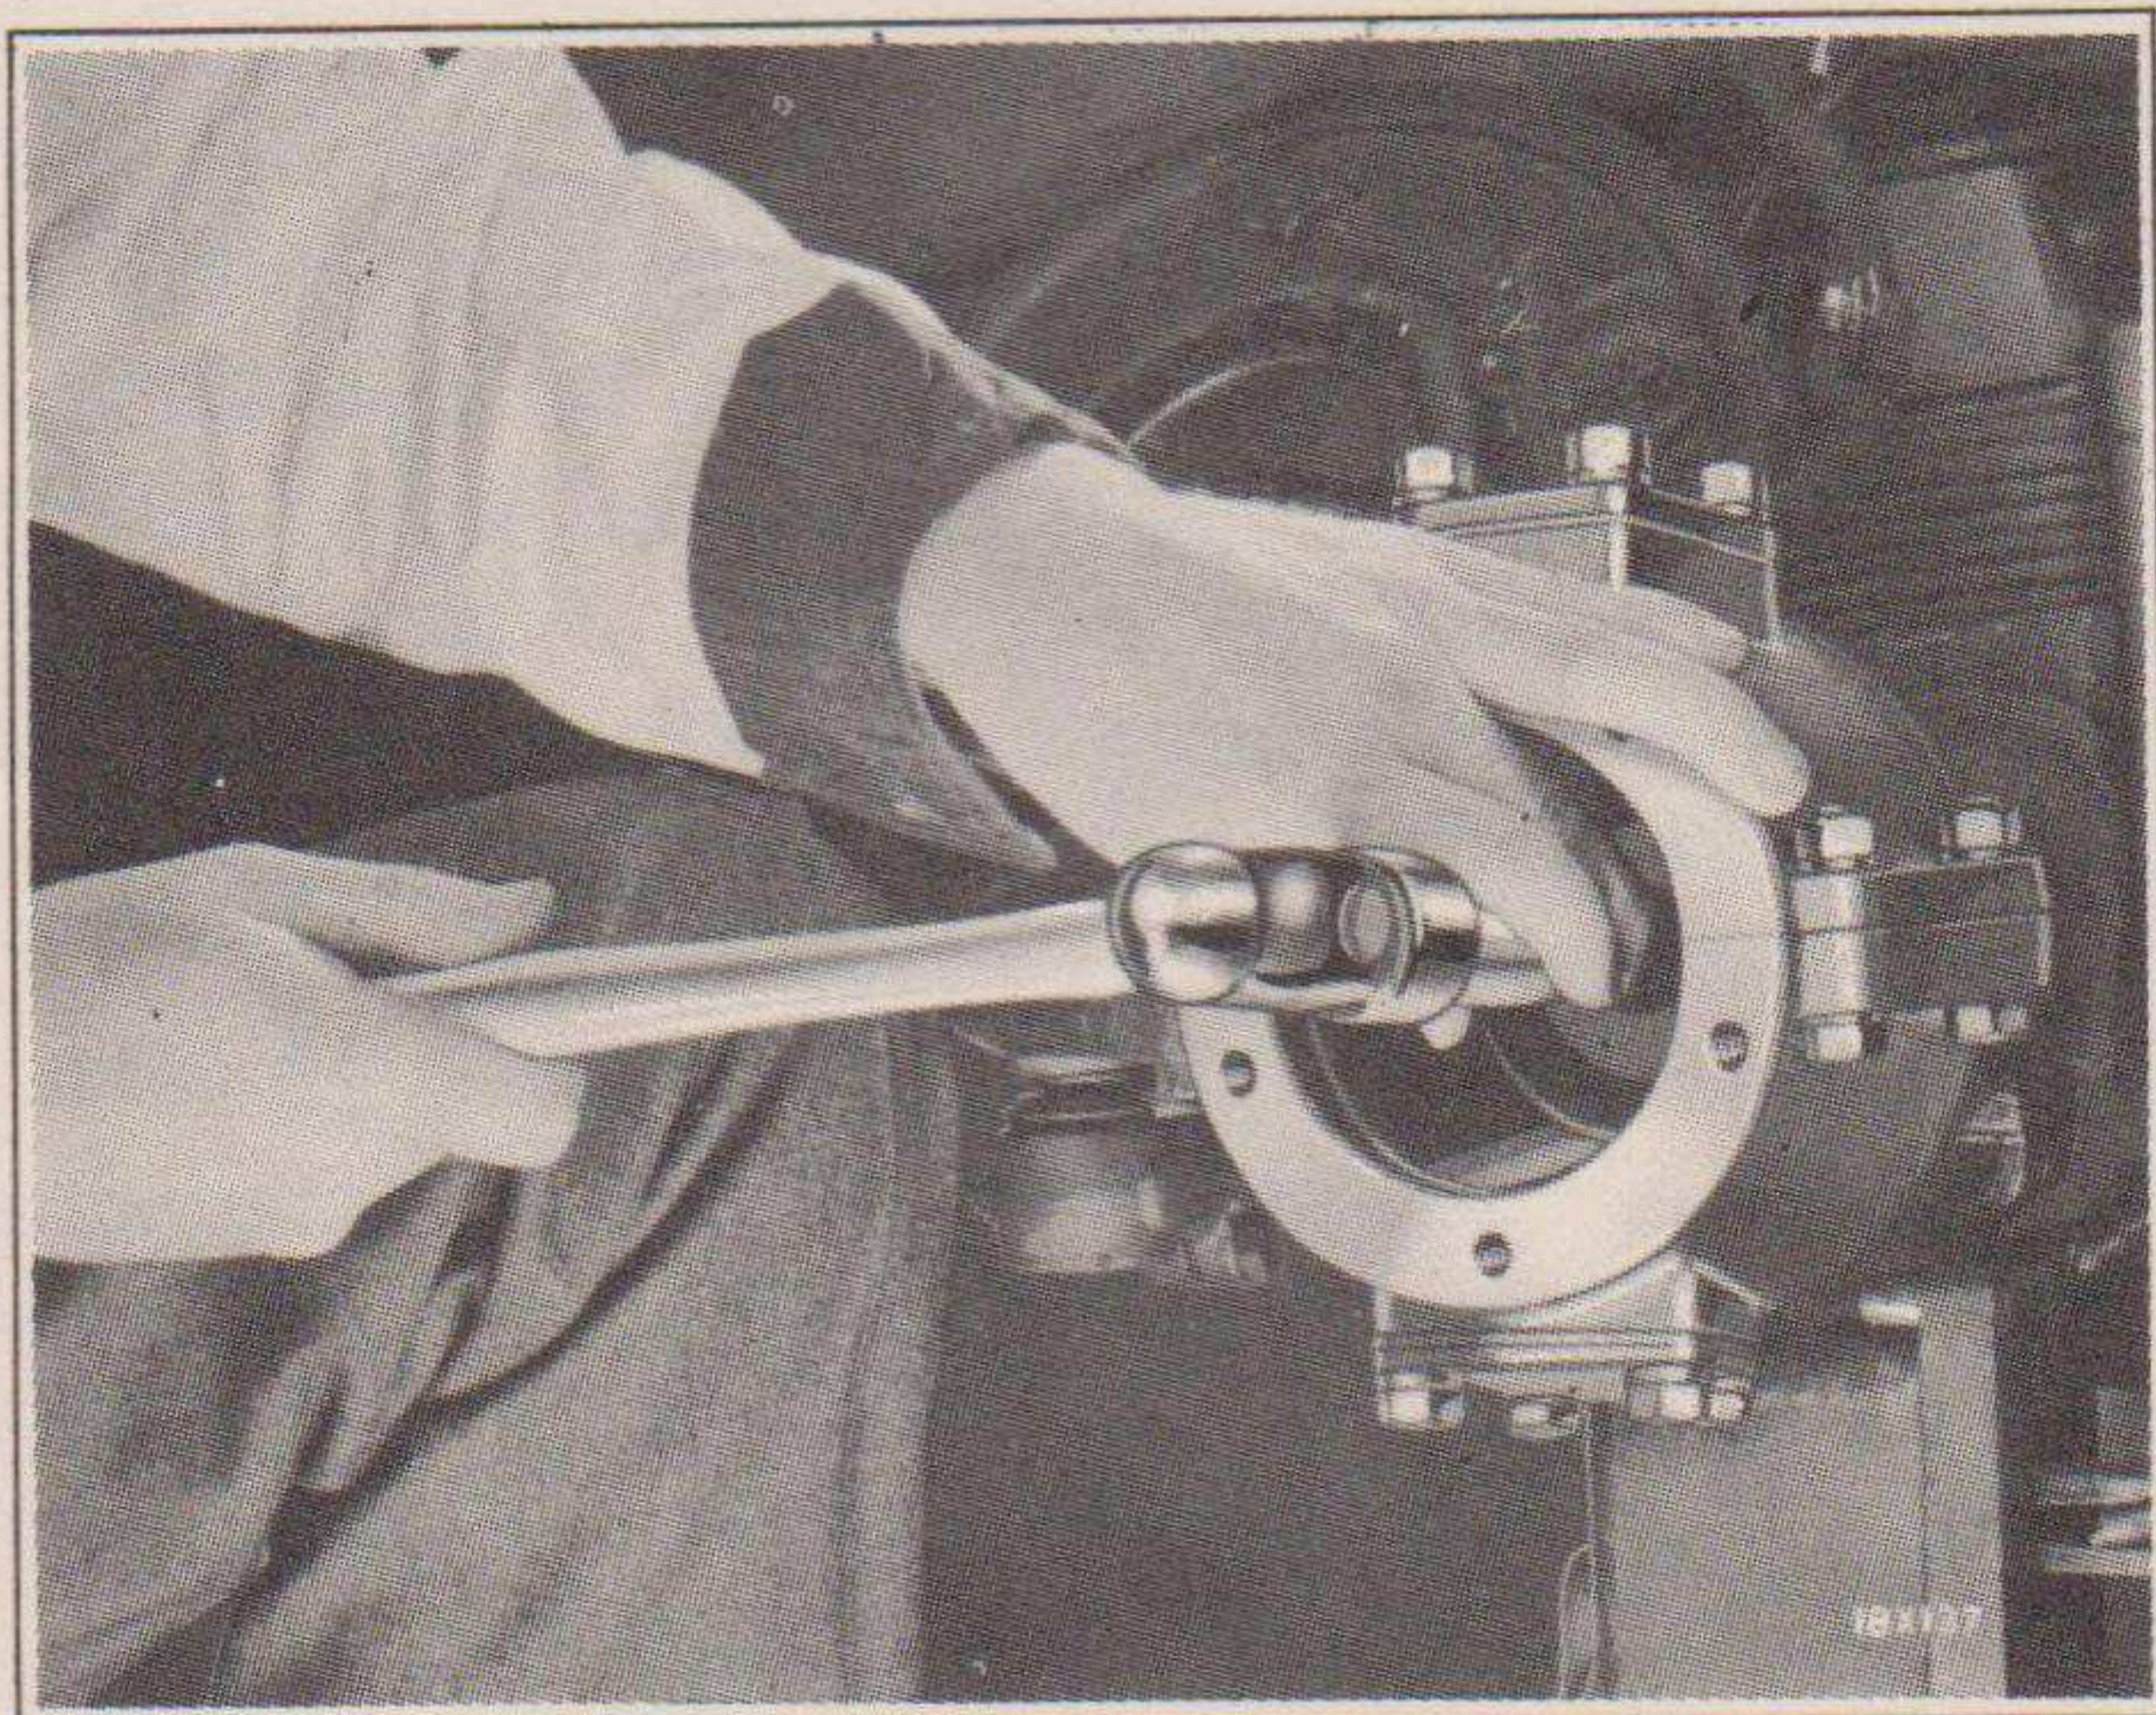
Installing Universal Drive Shaft Oil Seal (Tool DD-827)
